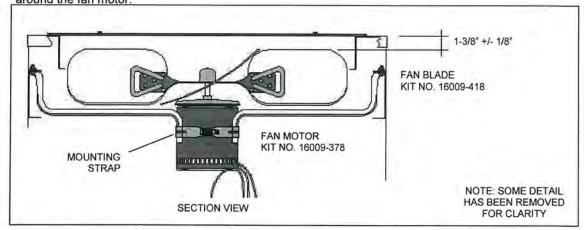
SECTION VIEW SHOWING PROPER FAN HEIGHT
